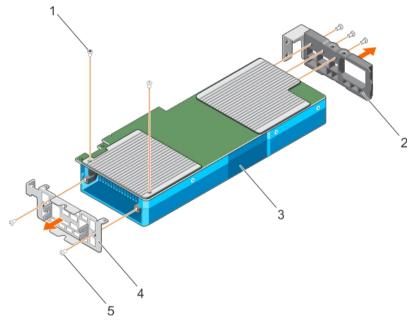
Removing the custom Nvidia GPU I/O brackets and the support brackets
